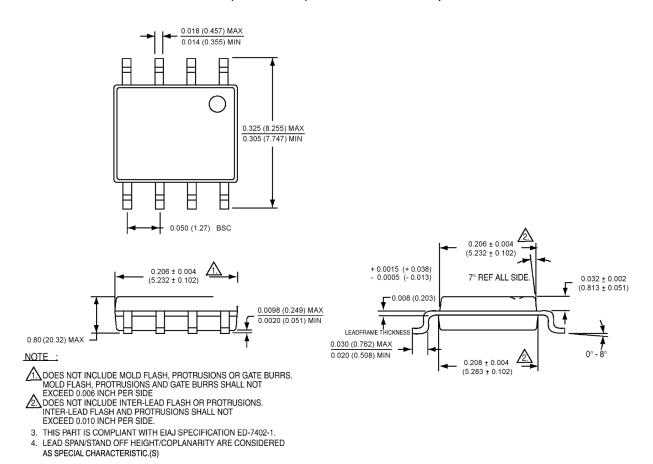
8-pin Molded Small Outline Package (MW8), Package Number M08D
